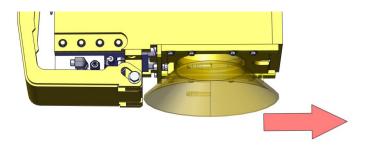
Slide the Steel Stabbing Bell toward the front of the gripper to remove
